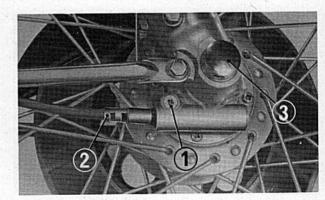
(1) Set screw (2) Speedometer cable (3) Front wheel axle
